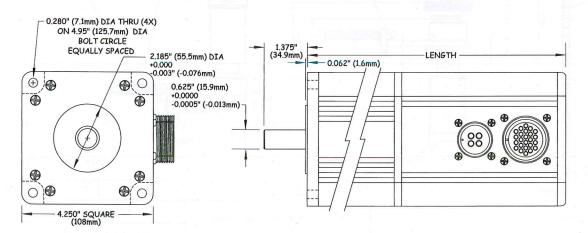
An outline assembly drawing provides the necessary dimensions for an installation. This drawing shows the requirements for a servo motor installation. (Animatics Corp.)
